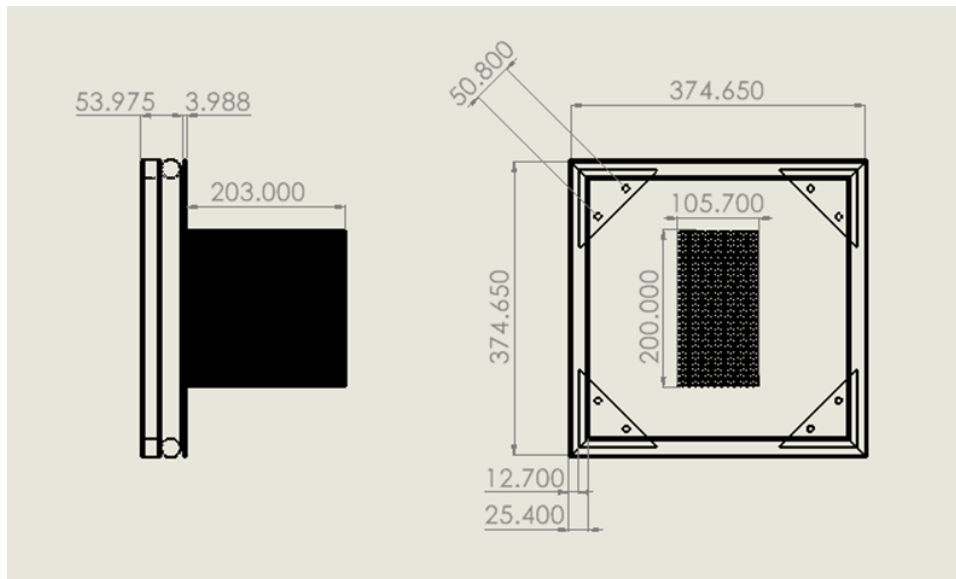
Impact Attenuator Test Assembly CAD Drawings
